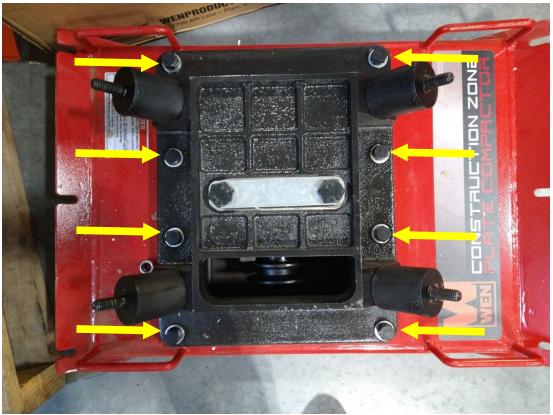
Remove the 8 mounting bolts, then gently remove the exciter seat and vibrating assembly from the bottom plate.
